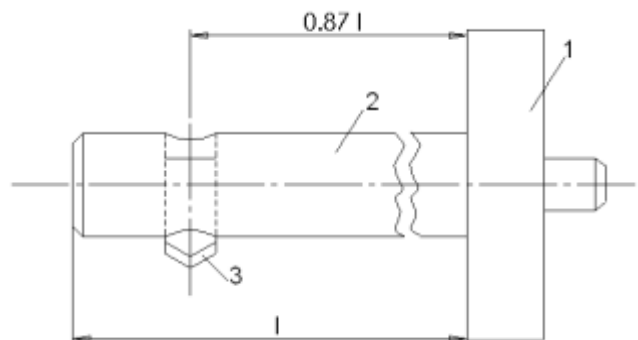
Modified boring tool structure with cutting edge located in the nodal point of the third natural vibration mode at the distance $0.87l$ from the anchor point. 1 - tool holder, 2 - boring bar, 3 - insert
